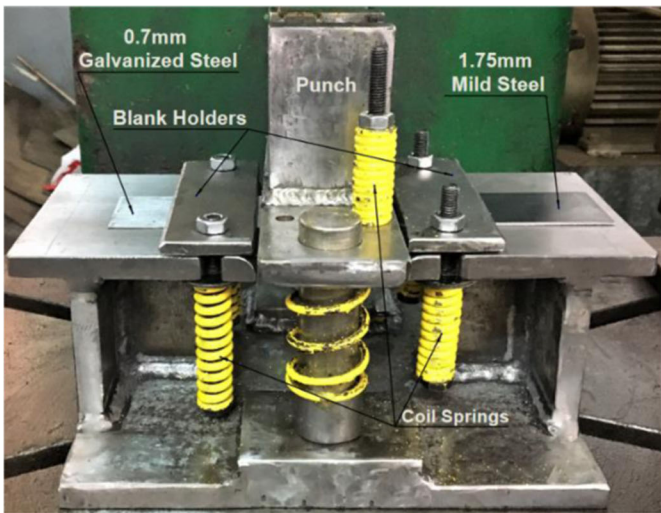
Assembly and dimensions of the die set used in the experimental work
